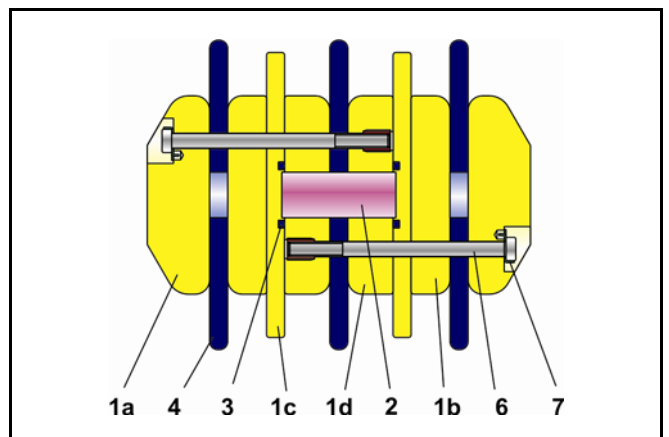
Sectional view of a TWIN 5 pig => Parts list, see Table 4 on page 5
